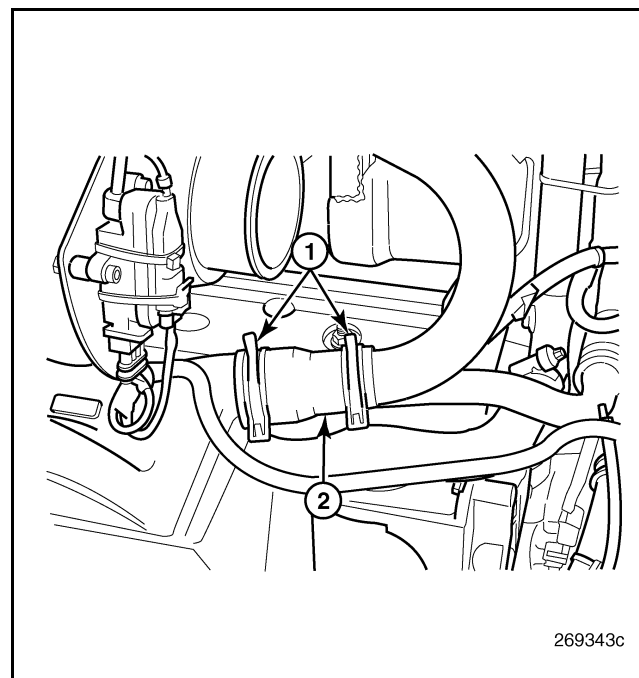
Cool Tube Hose Connection (Cooler Connection Shown)
